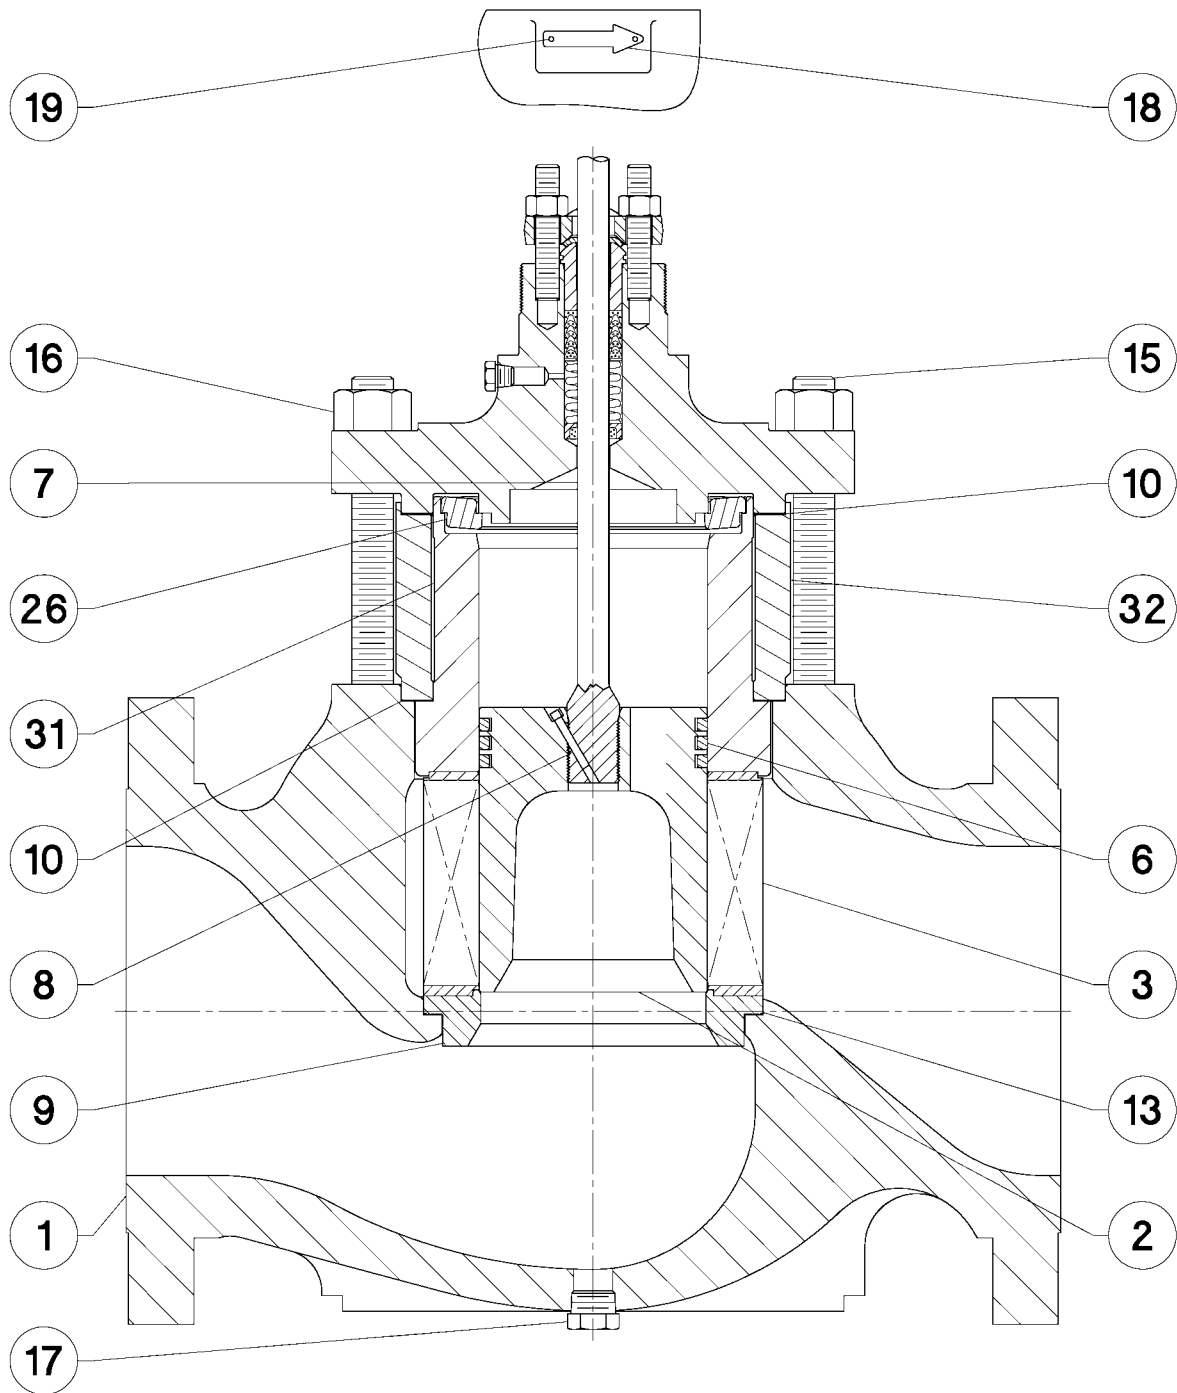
8-Inch Design ED Valve with Graphite Piston Ring
